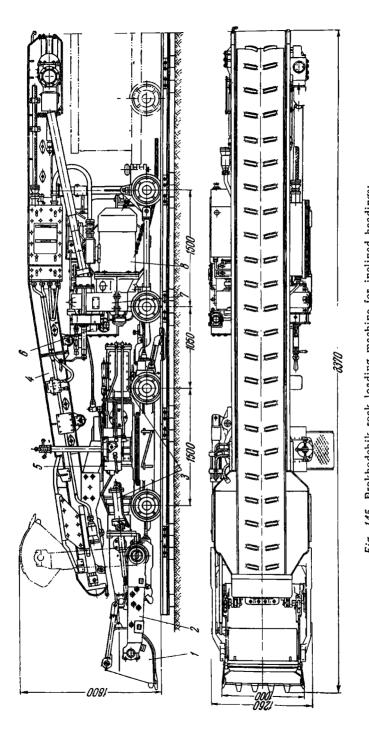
Prokhodchik rock loading machine for inclined headings:
